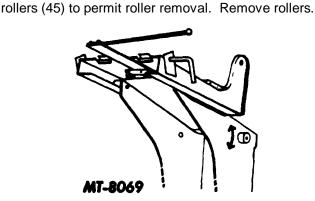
Removing Channel Assembly from Upper Panel Assembly
